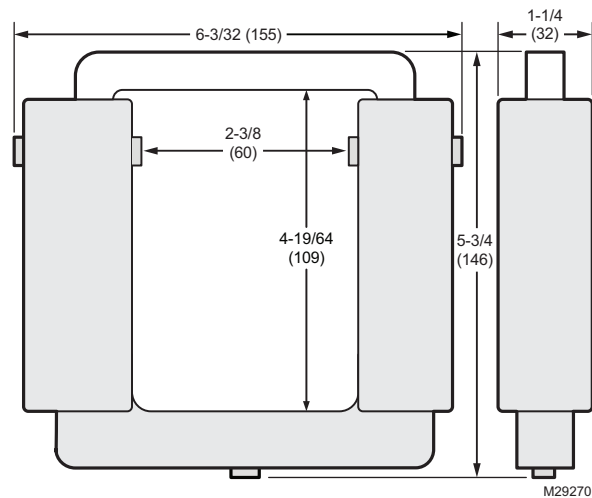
800 & 1600 Amp current sensor dimensions in in. (mm).
